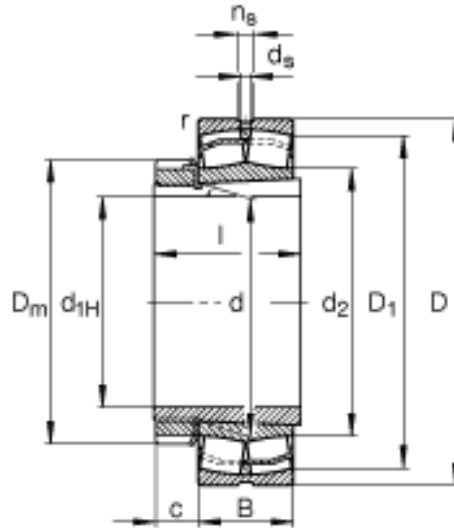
Dimensions of the FAG 23228 spherical roller bearing with an H2328 adapter sleeve
